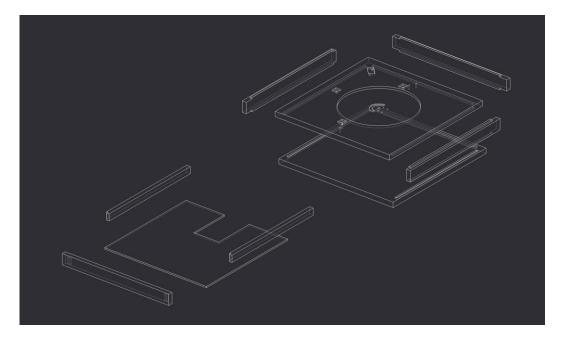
3D exploded view of old floor and drawer design. Extracted from PTC CREO Parametric 5.0.
